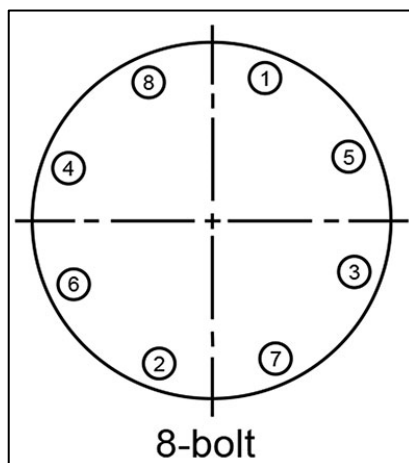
Sequential order to tighten bolts on flanges to ensure a gas-tight seal.
